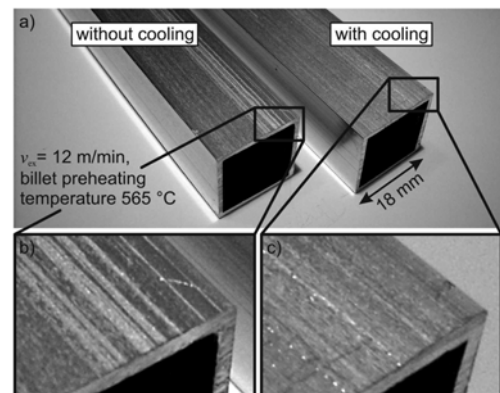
Extruded specimen (a) of EN AW-6082, with (b) and without (c) surface defects
